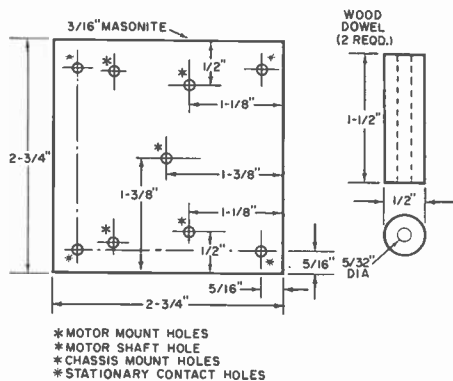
Fabricate the rotary switch on a 2 3/4" x 2 3/4" piece of Masonite and bolt it to the chassis using two 1/2"-long dowels and 2"-long screws.
